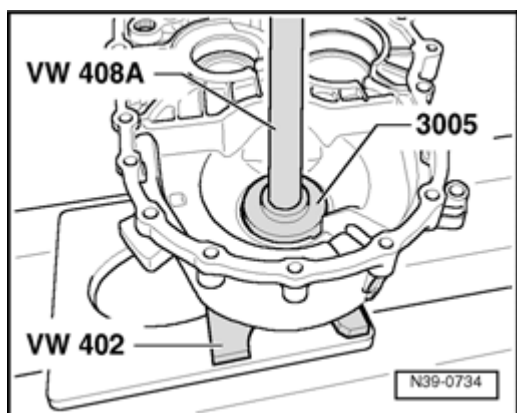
Pressing tapered roller bearing outer race into clutch housing
